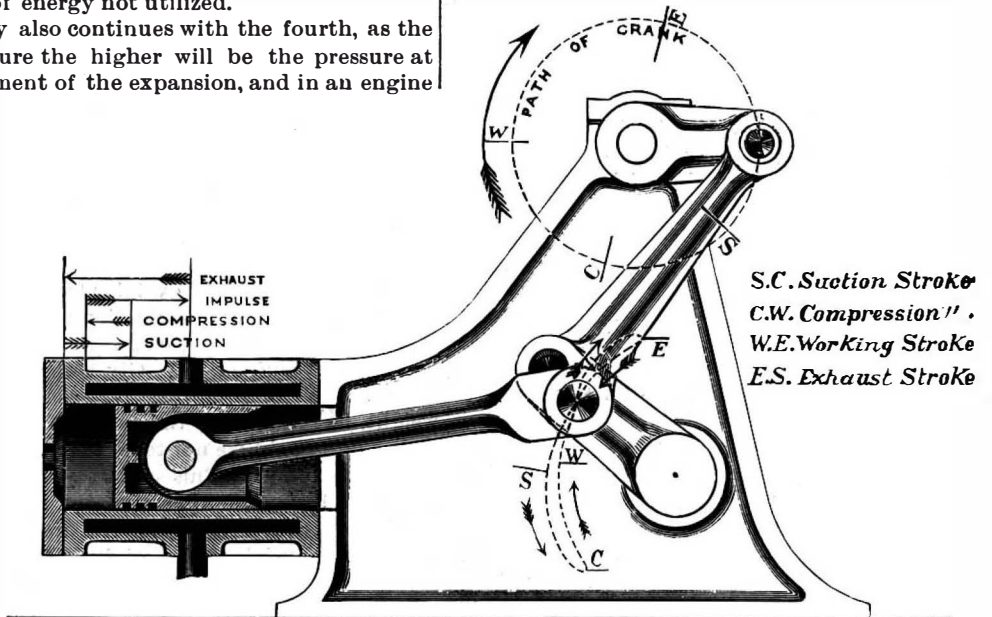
LONGITUDINAL SECTION OF THE ATKINSON GAS ENGINE.
